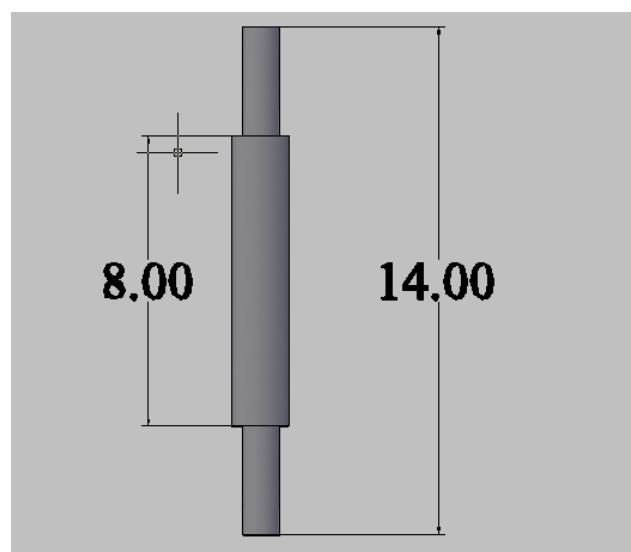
Top View of the shaft with drum (all dimensions are in inches)
